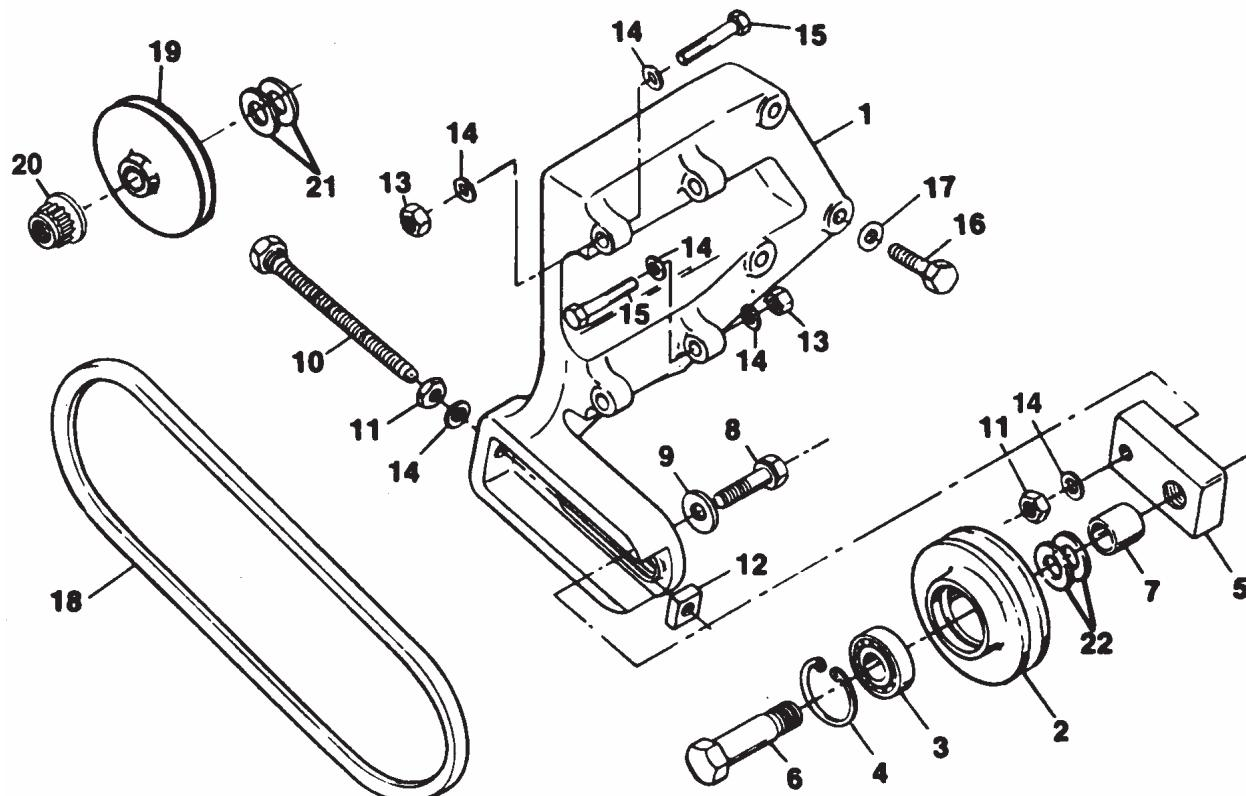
Optional Refrigerant Compressor Mount Assembly
